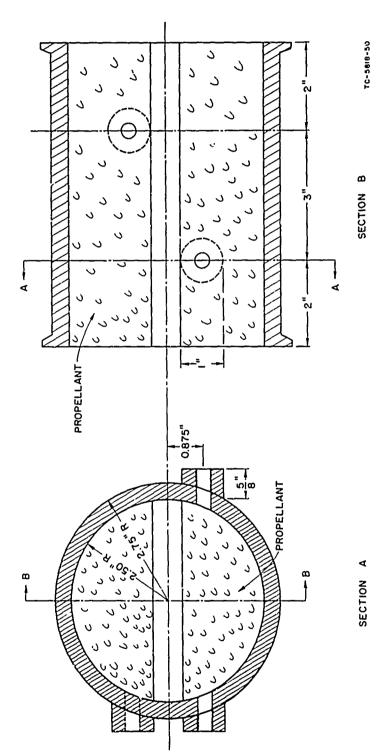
TEST MOTOR USED TO OBTAIN FIBER OPTIC PHOTOGRAPHS
